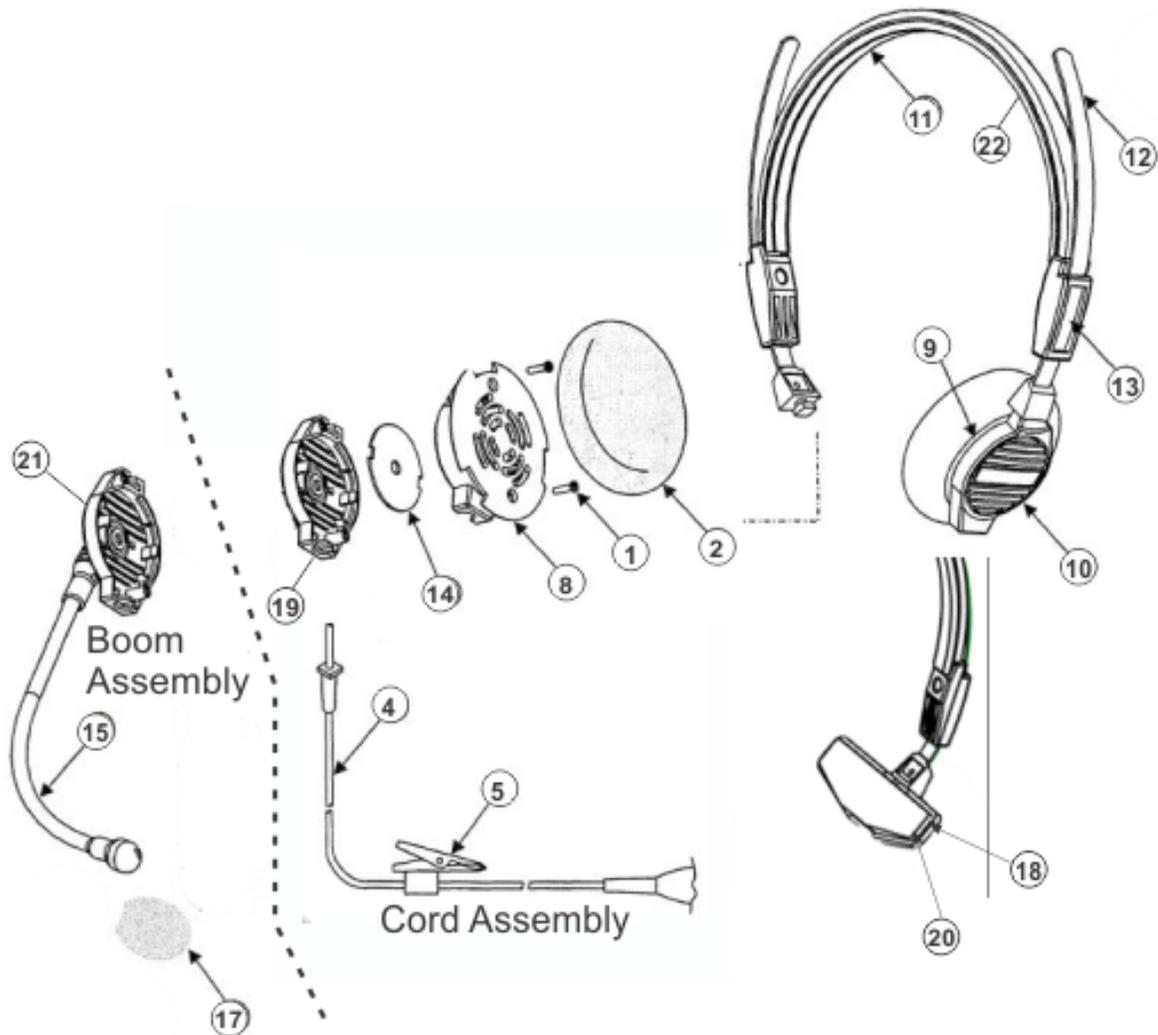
Airman 750/760 Series-200/300 Exploded View
